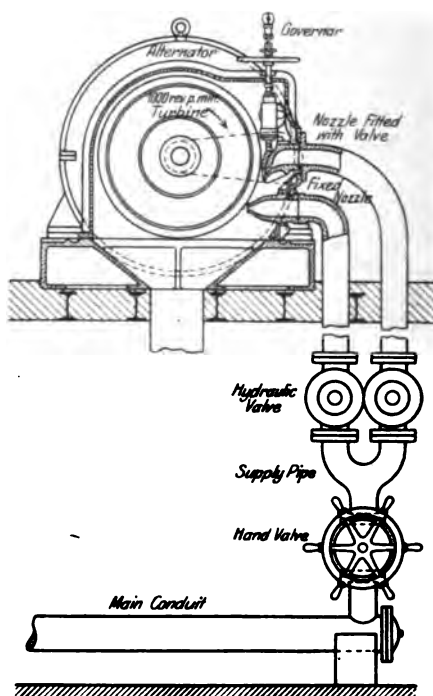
Detail of Wheels supplied by the Société de Constructions Mécaniques de Vevey, for Vauvry Water-Power Plant, Switzerland.
